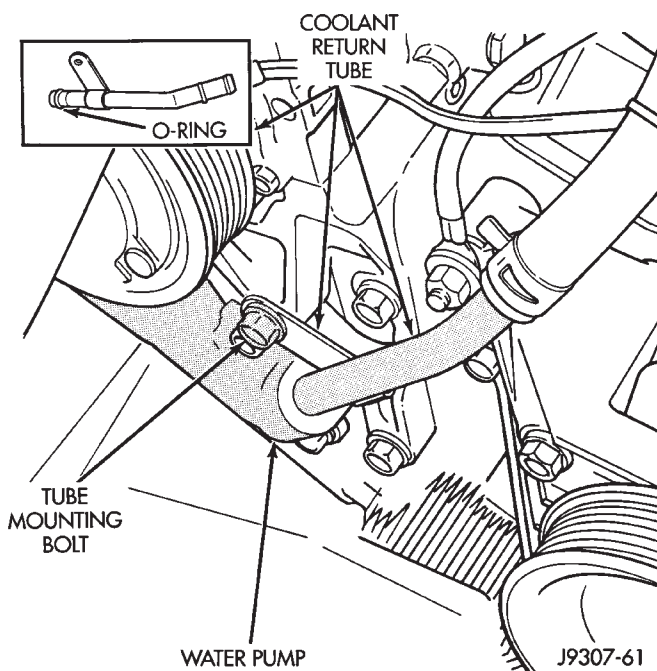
Coolant Return Tube—5.9L HDC-Gas Engine
